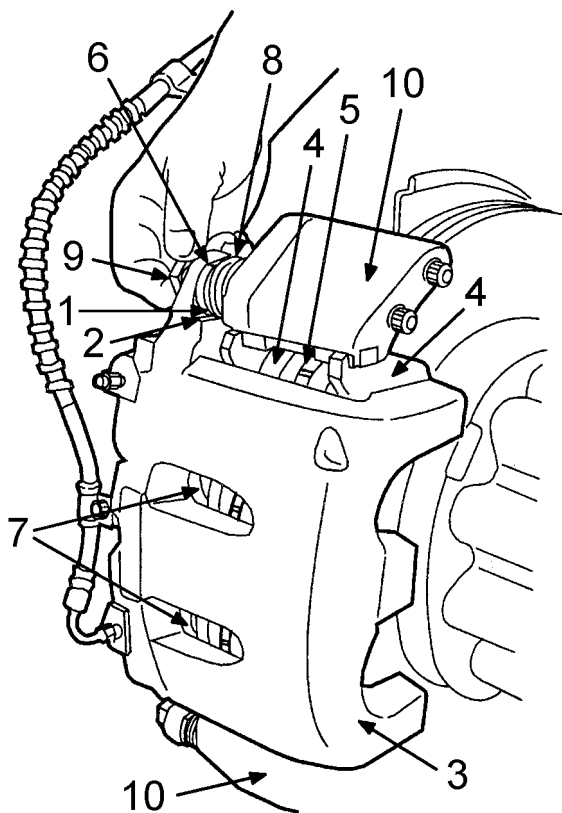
Rotate Caliper Closed and Install Upper Hex Mounting Bolt
